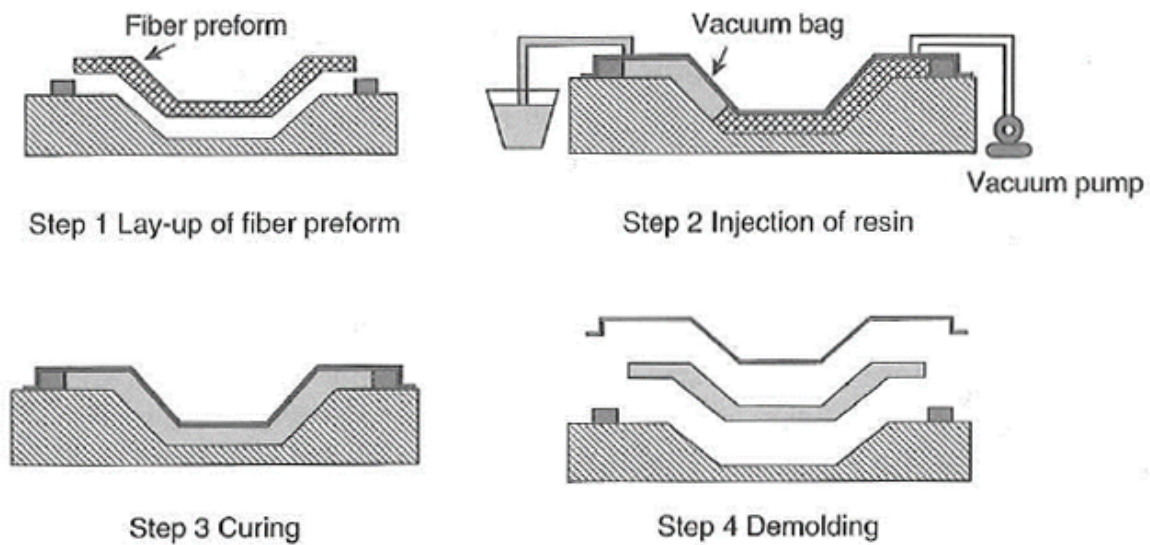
Main manufacturing steps in Vacuum Assisted Resin Transfer Moulding (VARTM) [15]
